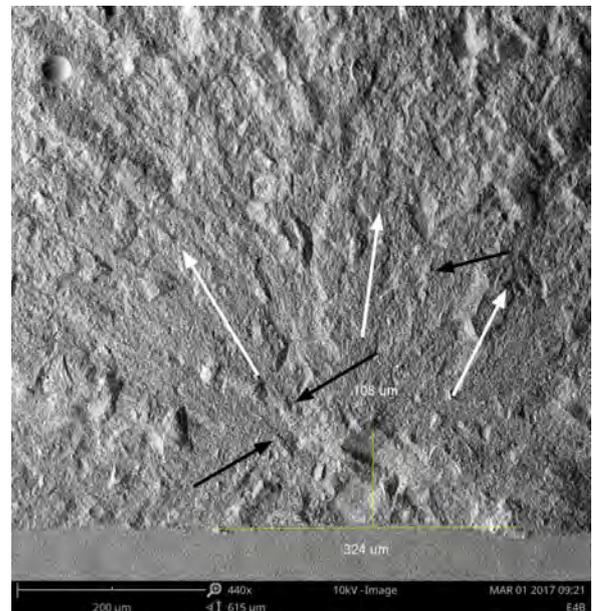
Example of a surface crack. Yellow lines indicate the width and depth of the crack at the fracture origin. Black arrows indicate direction of crack propagation away from the crack origin. White arrows indicate twist hackle marks on the fracture surface.
